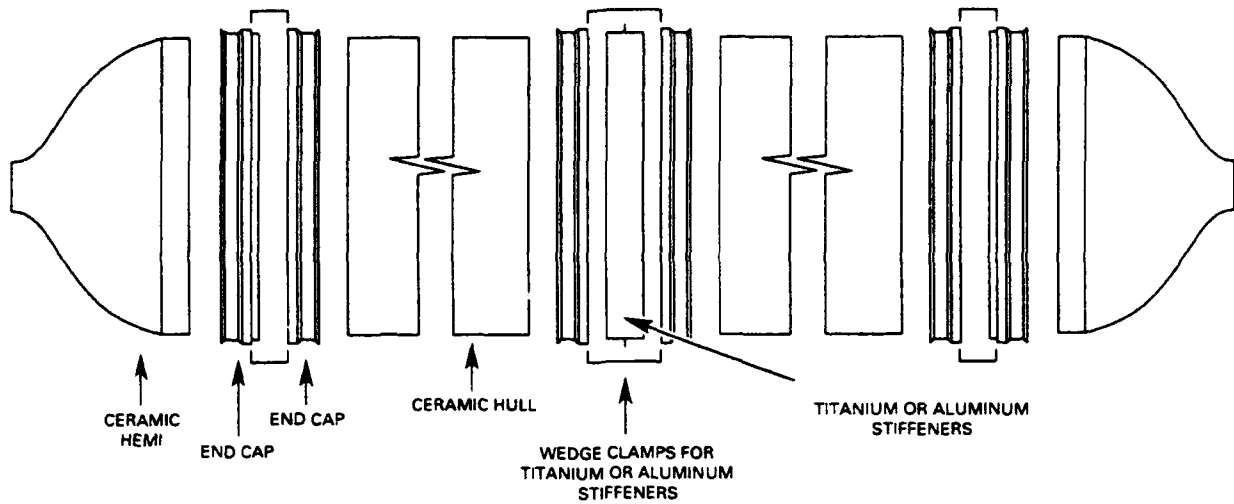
Schematic of typical deep submergence housing assembly designed by NRaD.
